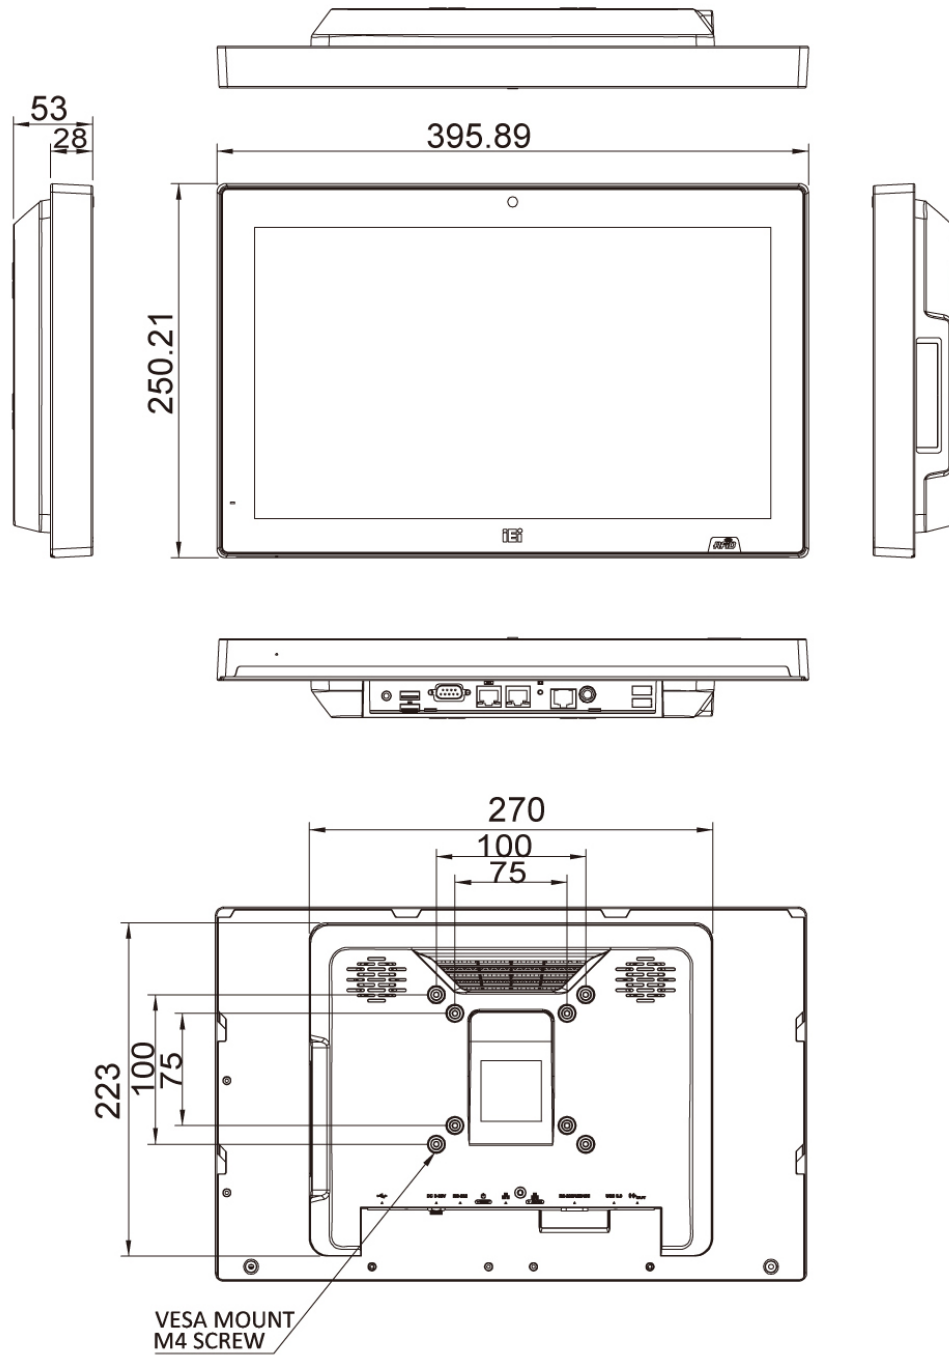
AFL3-12A-BT Dimensions (mm)
